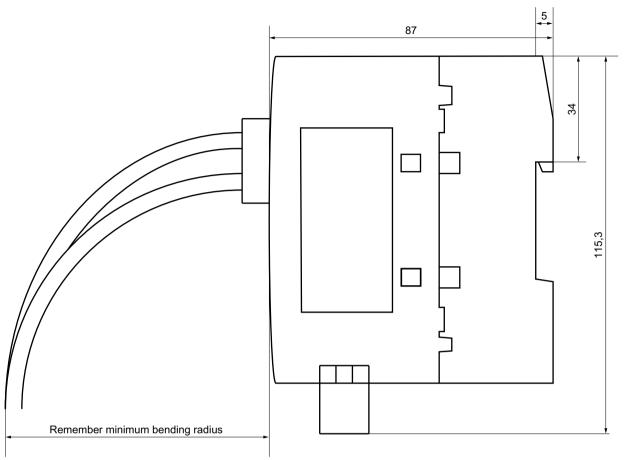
Dimension drawing, side view (example: SCALANCE XB004-1)
